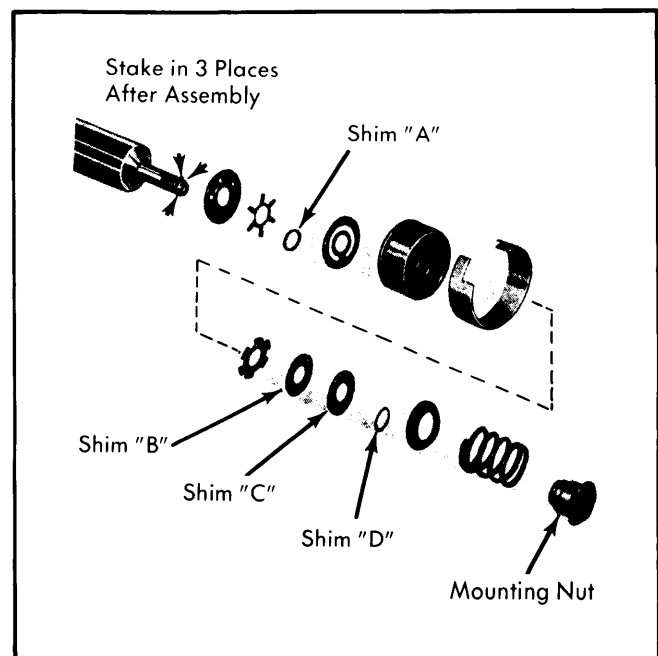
Reassembly Sequence for Buffer Valve. Assemble Components Over Strut Shaft Stem. Refer to Table for Correct Shim Thickness.
